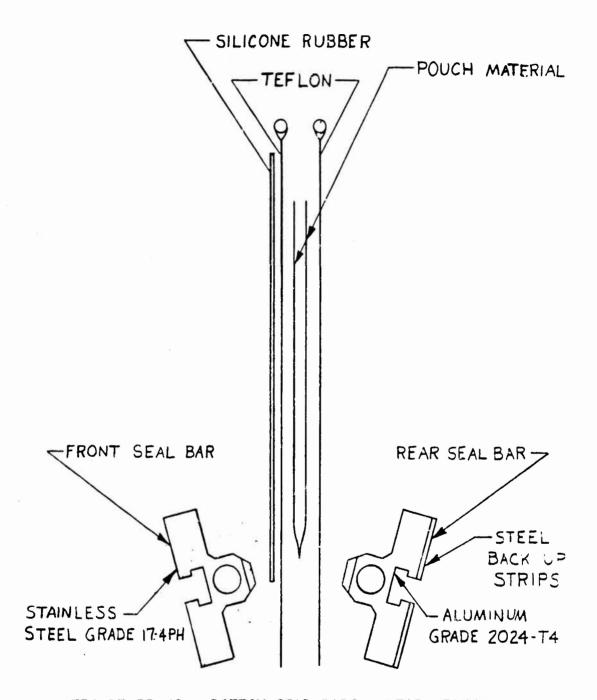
BOTTOM SEAL BARS - REAR HEATED
